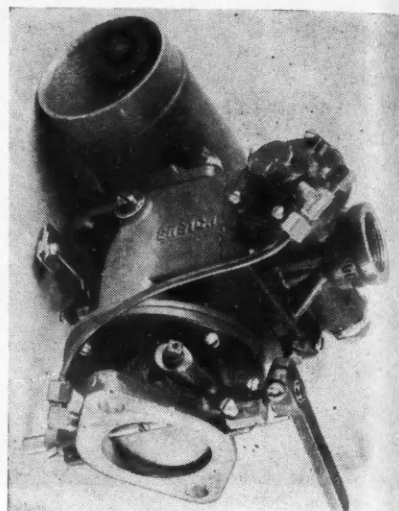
The Ensign downdraft type carburetor showing throttle lever, balance line and the easy starting device
